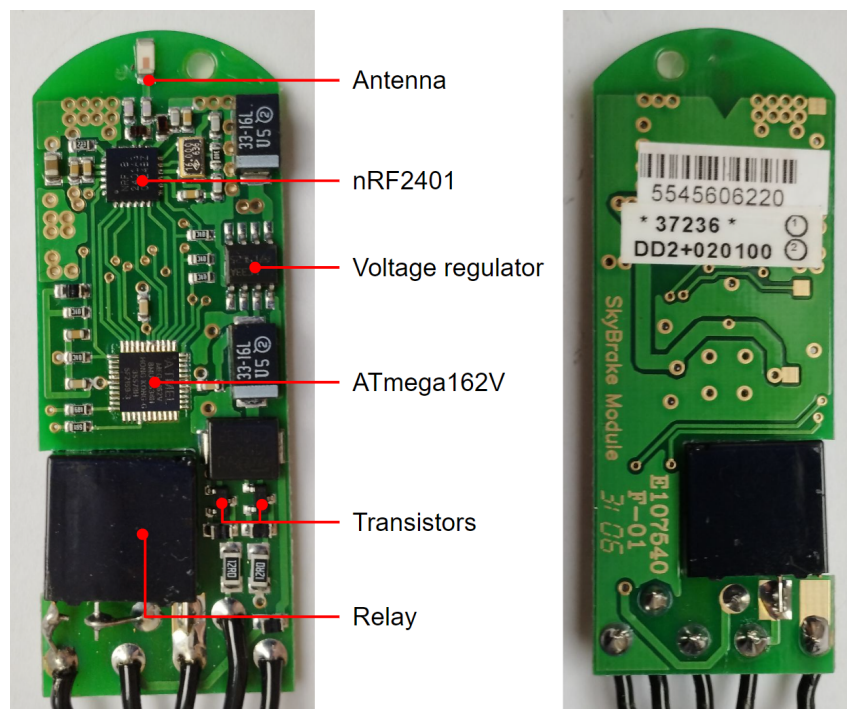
Top and bottom sides of the PCB of the car module of the Skybrake DD2+ immobilizer
